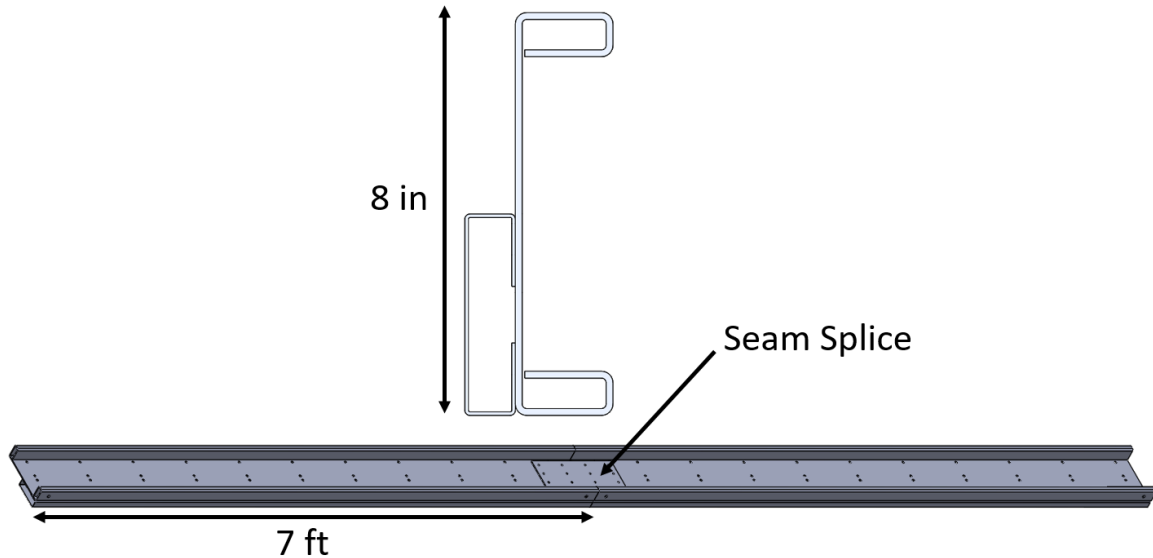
Top: Cross sectional view of base rail. Bottom: Isometric view of conjoining rails (cross sectional view on the left end).
